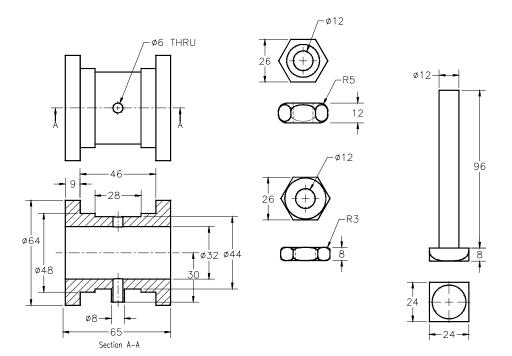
Views and dimensions of Brasses, Nut, Lock Nut, and Bolt
